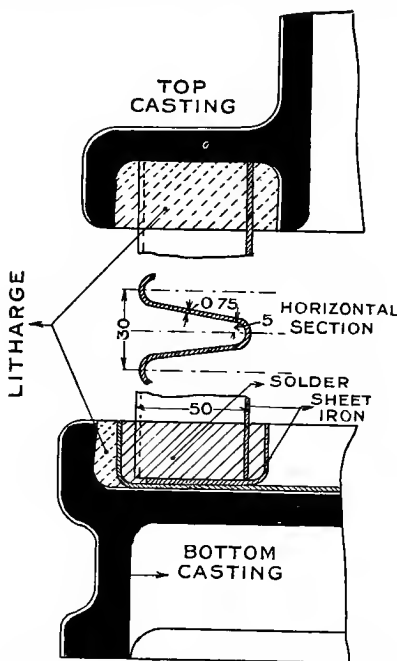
Joints between Corrugated Sheets and Cast-Iron Top and Bottom.
